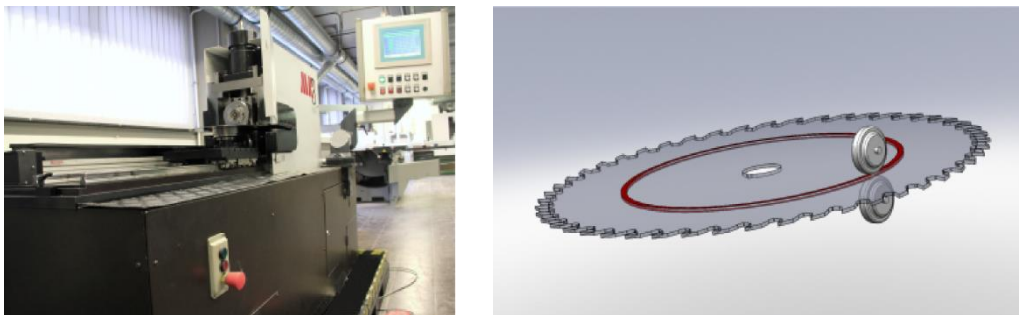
Roll tensioning machine (left) and schematic representation of roll tensioning (right)
